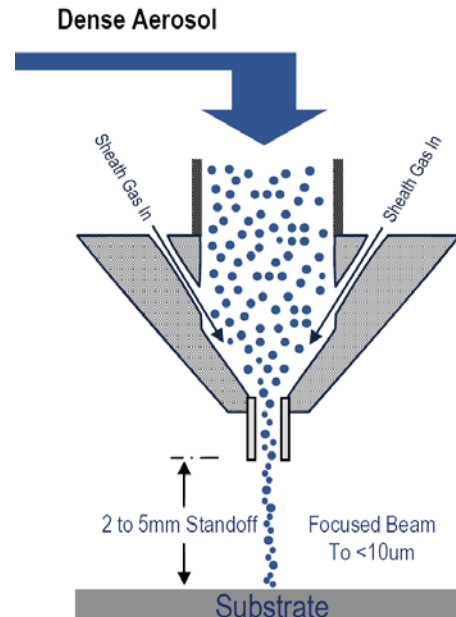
Aerosol Jet PCB Manufacturing Technology from Optomec [ref 32]
